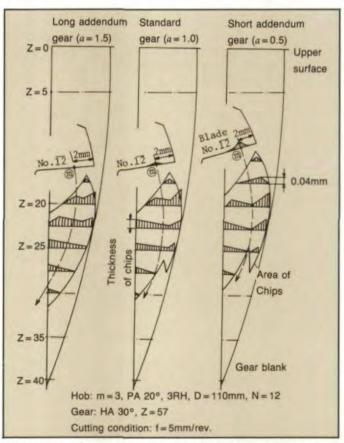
Shape of cutting chips from the right side cutting edge in case of reverse-handed conventional hobbing.
